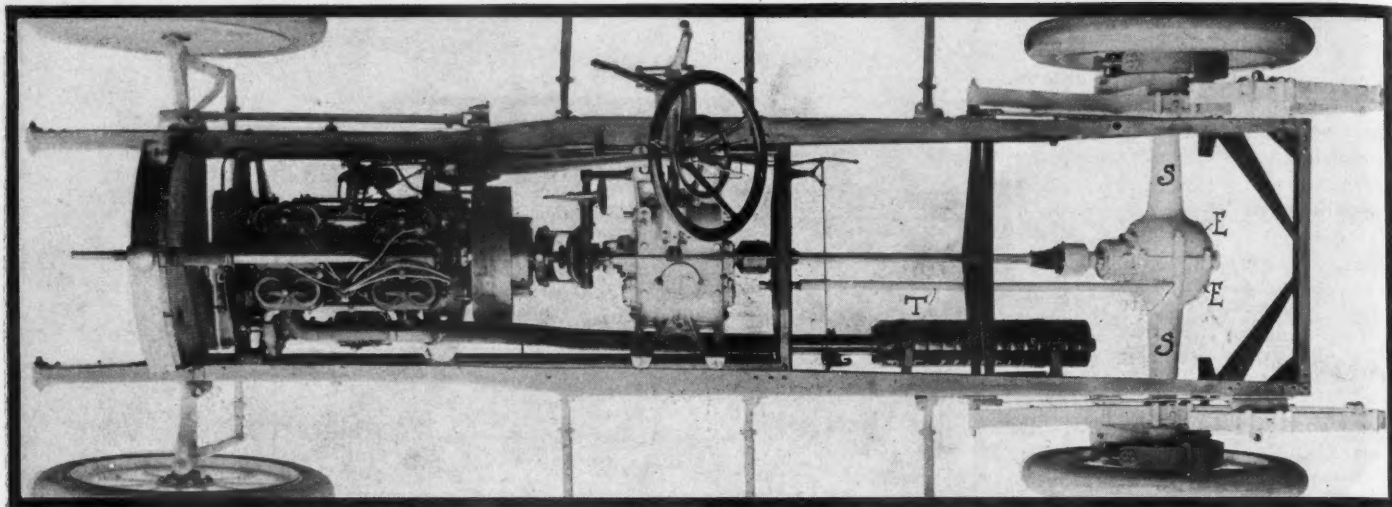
PREMIER FOUR-CYLINDER CHASSIS WITH REAR AXLE DETAILS ILLUSTRATED, THE AXLE BEING INTERNALLY RIBBED WITHIN THE DIFFERENTIAL HOUSING AS WELL AS WITHIN THE LARGER-DIAMETER PARTS OF THE SLEEVES, SO A TRUSS ROD IS NOT USED
